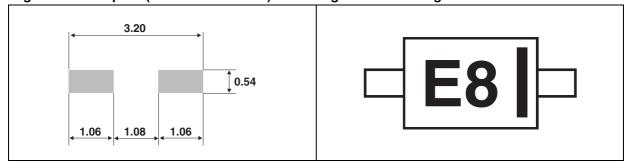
Footprint (dimensions in mm) Figure 12. Marking
